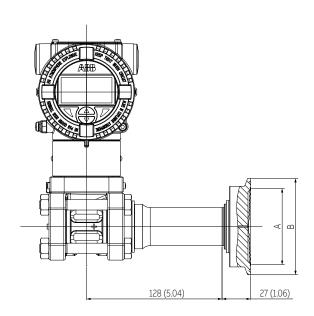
266DRH with barrel housing and direct mount seal S26SS Triclamp
